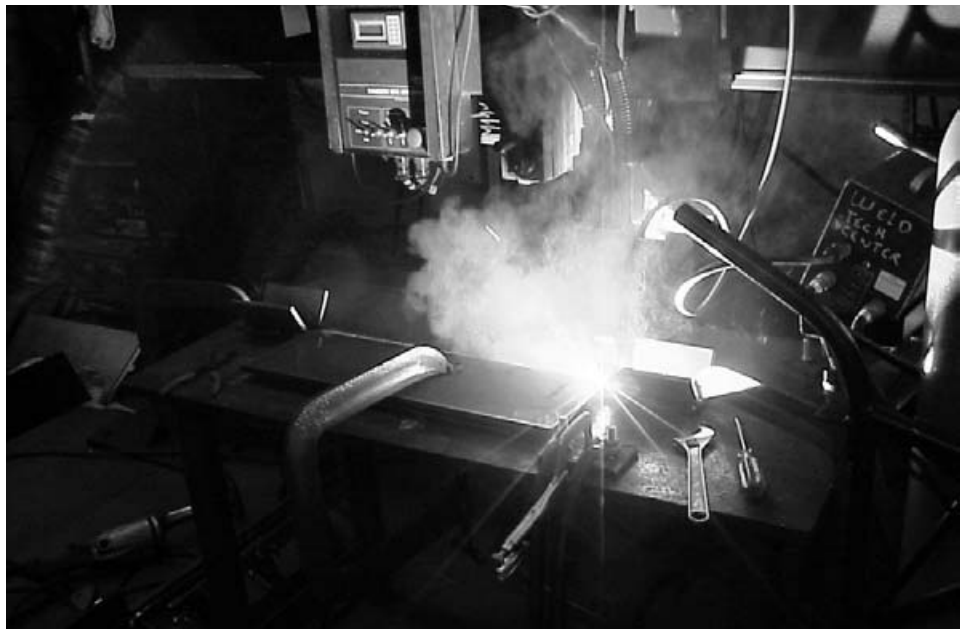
Welding ASTM 516 grade 70 base material test plates with tandem GMAW.
